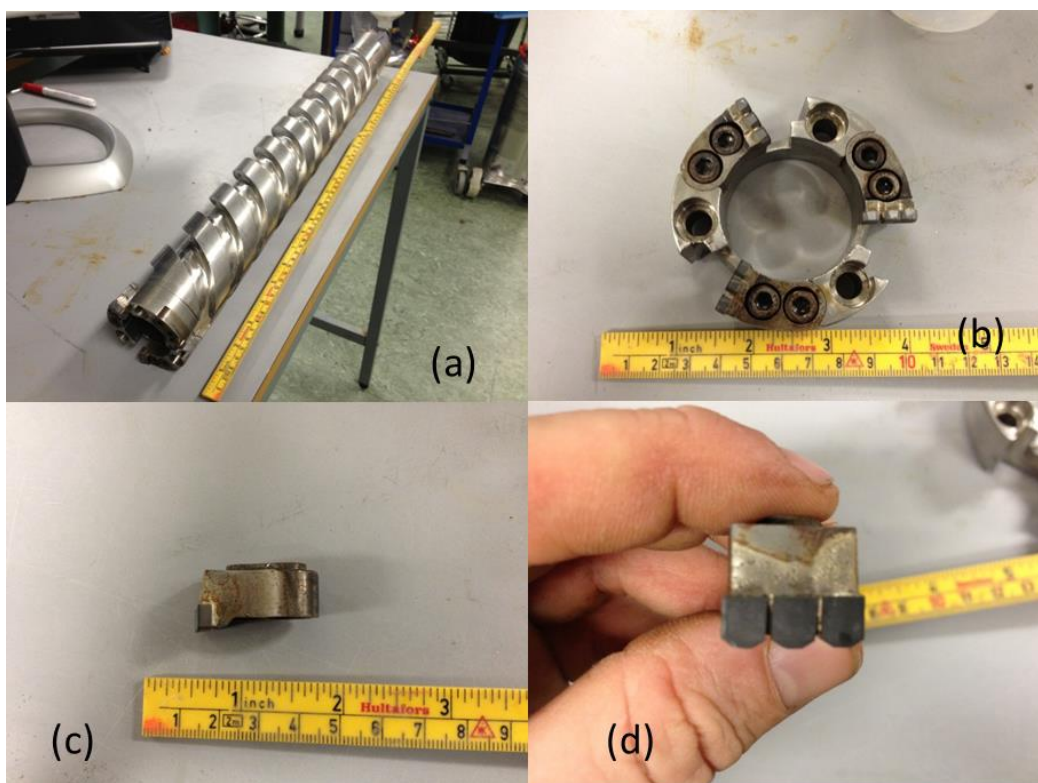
Permafrost corer (a) assembled (b) drill bit (c) cutting tool (d) poly-crystalline diamond composite inserts
